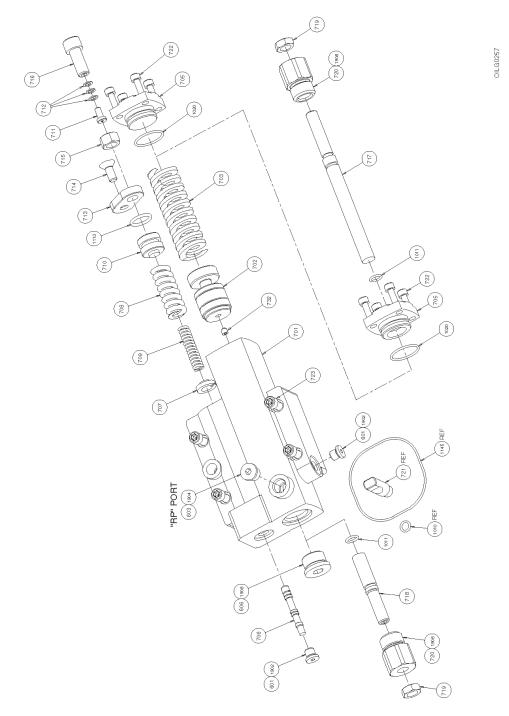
Exploded Parts Drawing for "P-1NN" and "P-LNN" Control (519975-101 sheet 2)
